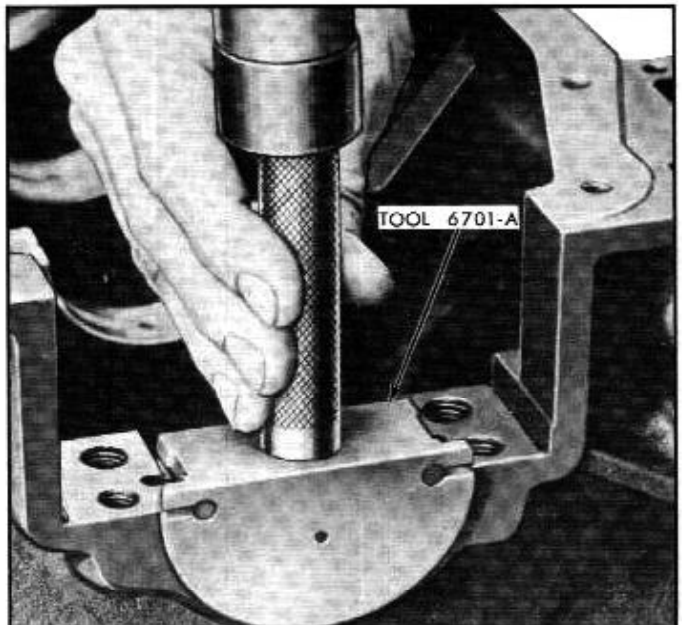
A-105—Installing Rear Crankshaft Oil Seal
